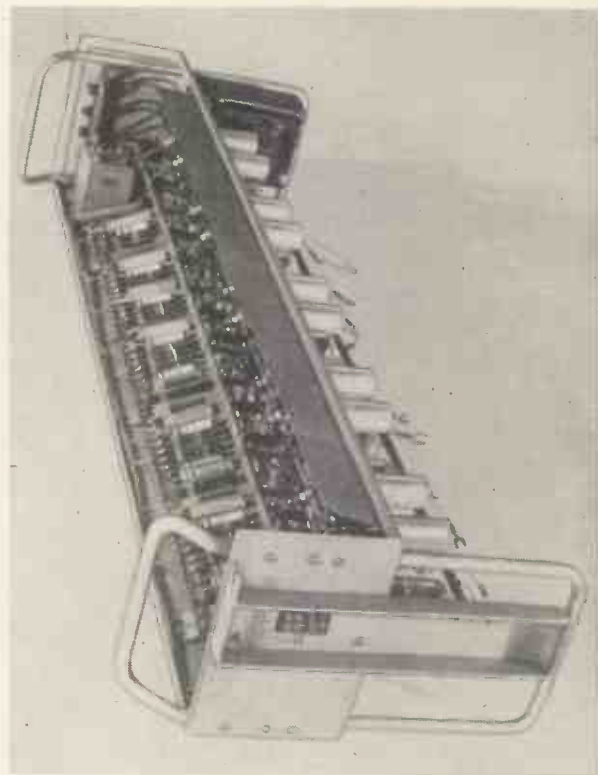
A typical unit showing component mounting, valves, heater transformer, pulse leads ending in spade tags and power supply plug
